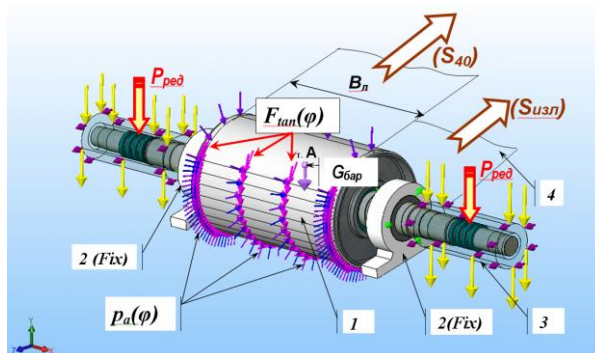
Two – sided leading drum from RBT 2250, Mini Maritca Iztok EAD -- 1-leading drum; 2- bearing supports; 3-pendulum – mounted gear reducers; 4 – belt
